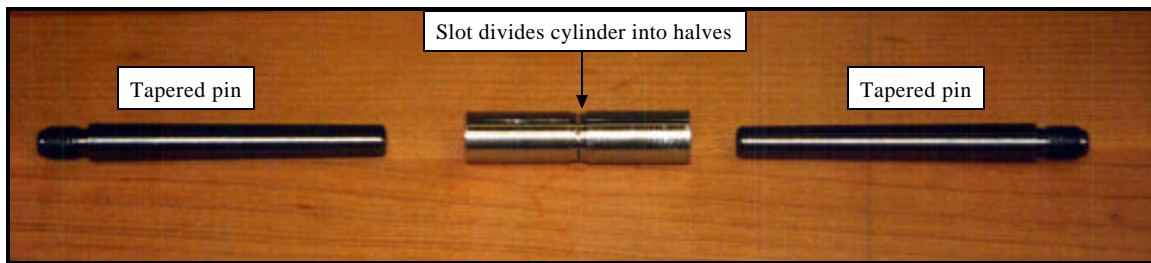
The gage assembly used to create the RECHII inserts is shown.
